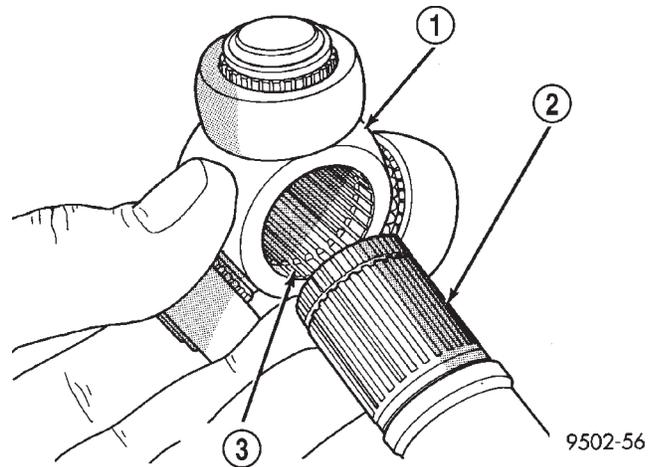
Spider Assembly Installation on Interconnecting Shaft
